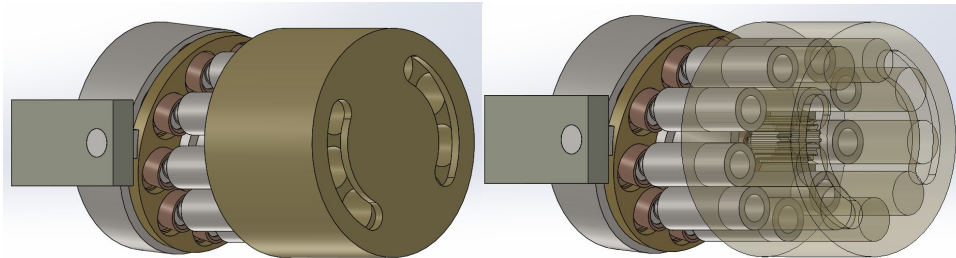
Digital solid model of a piston axial hydraulic pump with a swivel plate
